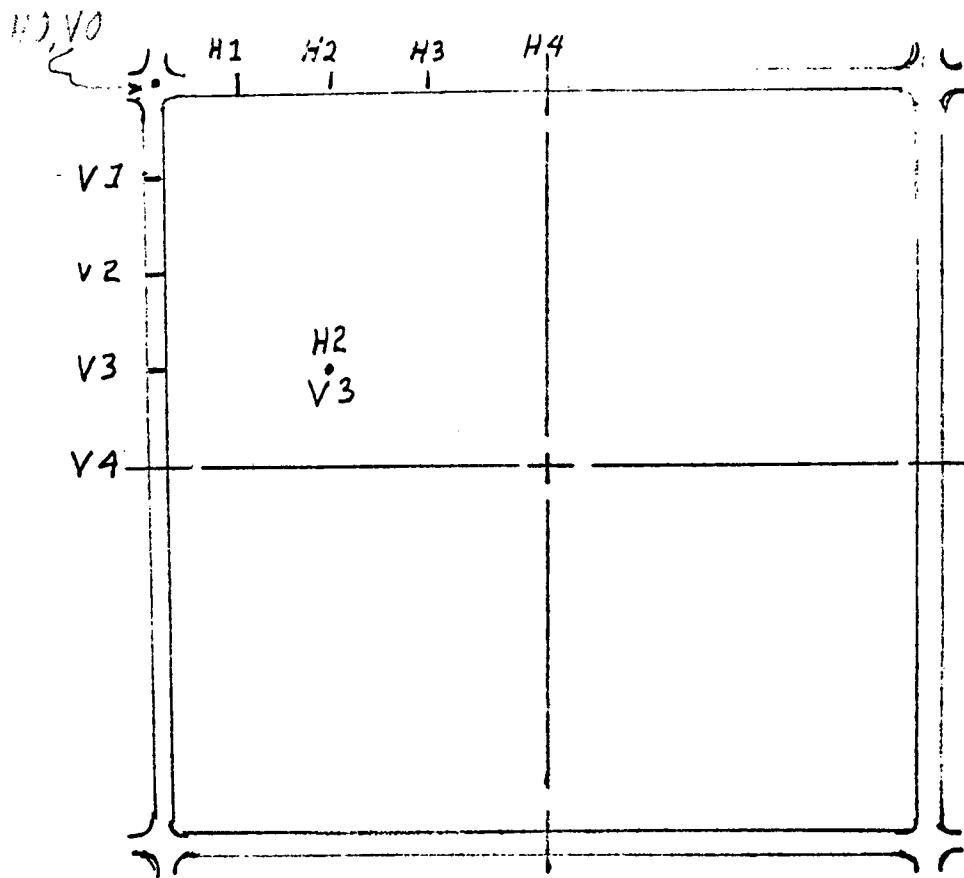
B OVERALL VIEW OF TEST FIXTURE
